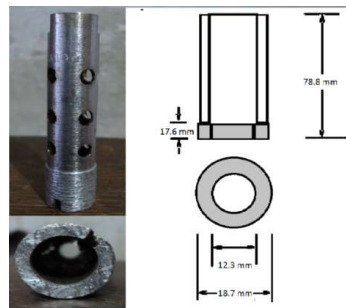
Picture of Drill Bit and its Dimensional Sketch
